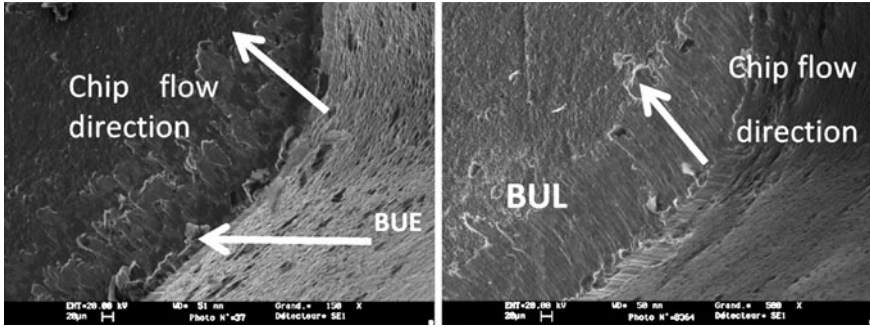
SEM micrographs of coatings after short-duration cutting tests. a C2 coating, CMM 5, $V_c = 700 \text{ m min}^{-1}$, $f = 0.1 \text{ mm rev}^{-1}$, $a_p = 1 \text{ mm}$. b C1 coating, CMM 15, $V_c = 500 \text{ m min}^{-1}$, $f = 0.1 \text{ mm rev}^{-1}$, $a_p = 1 \text{ mm}$
